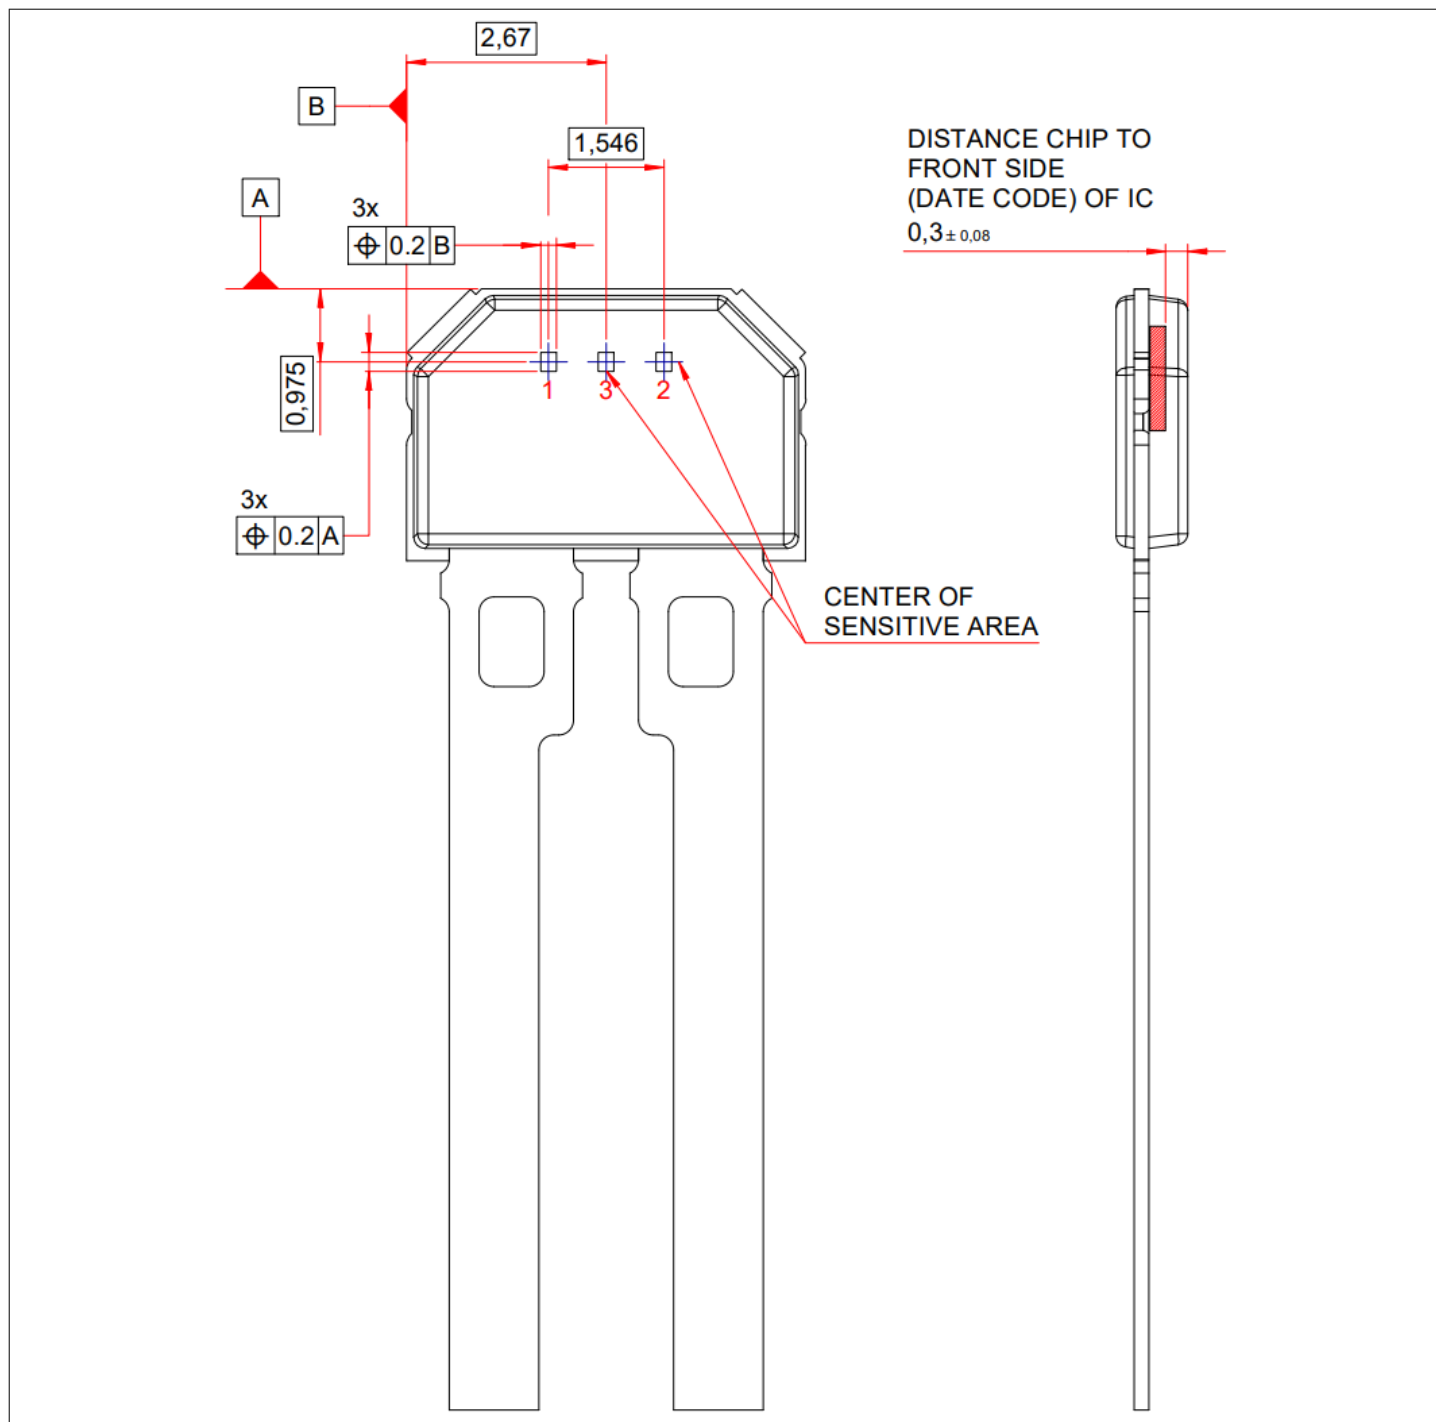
PG-SSO-2-51 package outline - sensing elements position details
